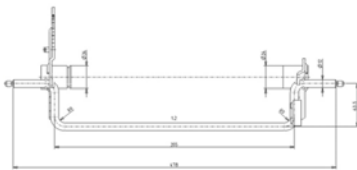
2D CAD Draft of the Lawnmower Axle
